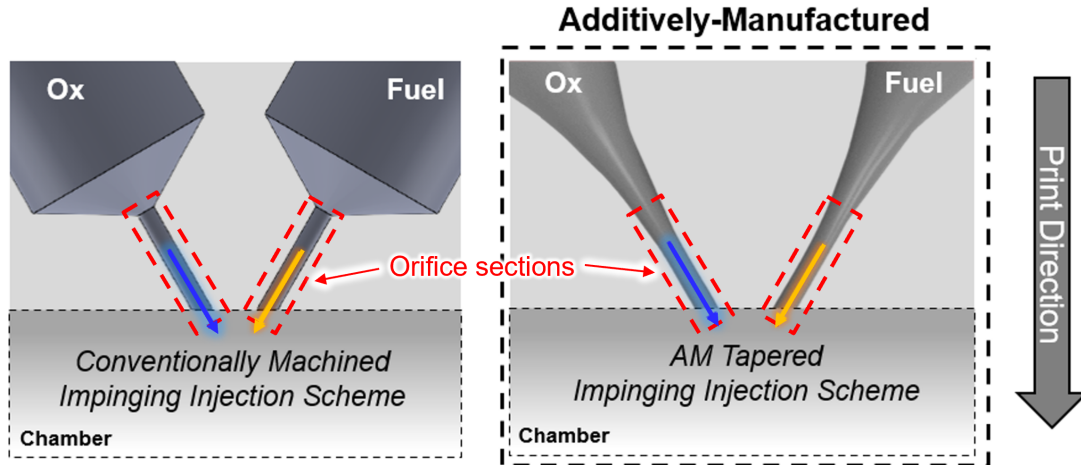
CAD cross-sections shown for the conventionally machined (*left*) and AM tapered (*right*) impinging injection schemes.
